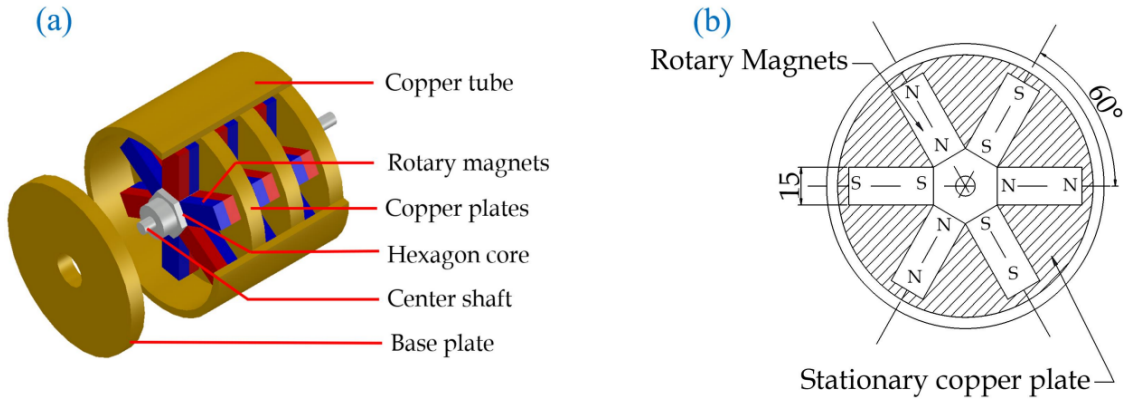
Configuration of ECD-B: (a) 3D view and (b) cross-section view
